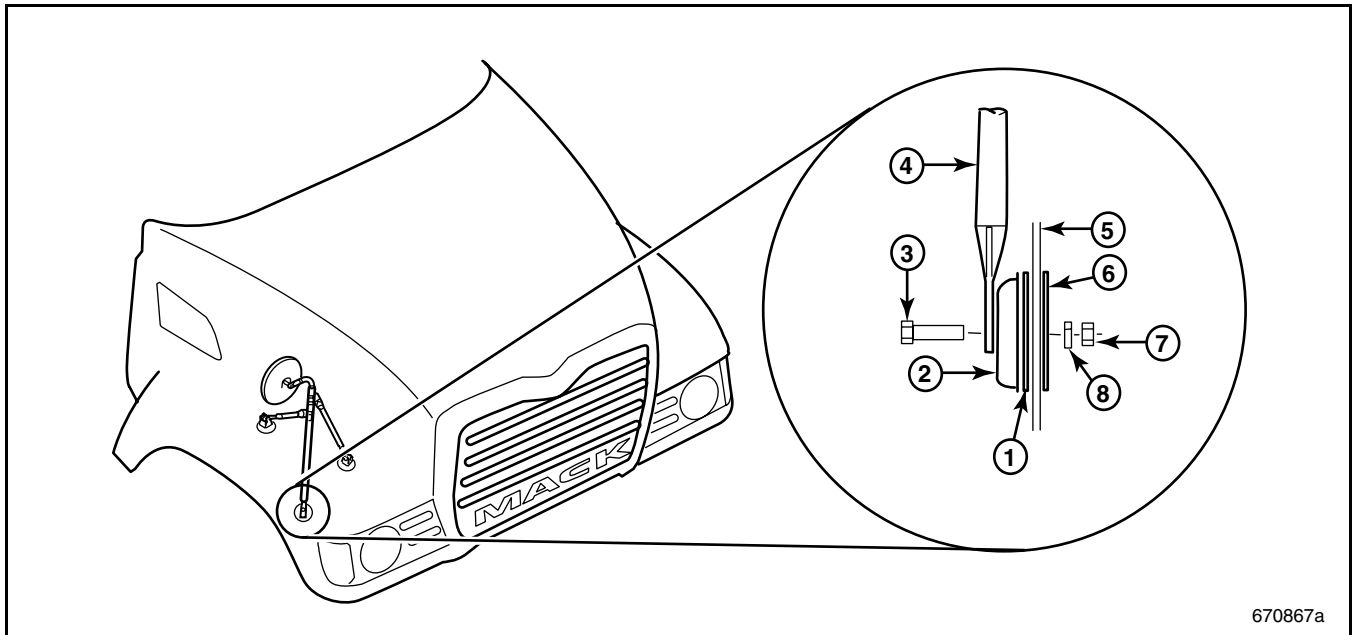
Typical Fender-Mounted Mirror Arrangement
